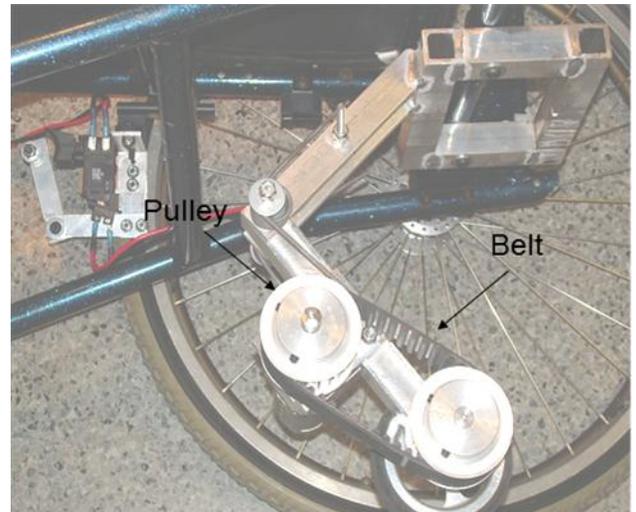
Left Hand View of Augmentative Power Assembly.
